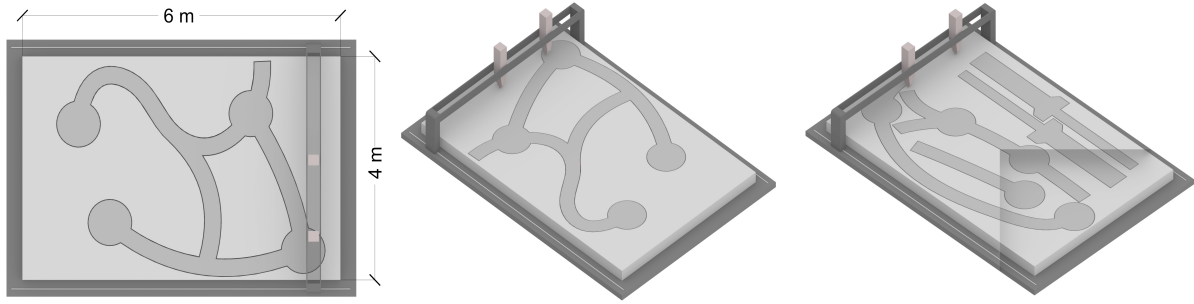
Nestling multi structural elements in the water-jet cutting unit
